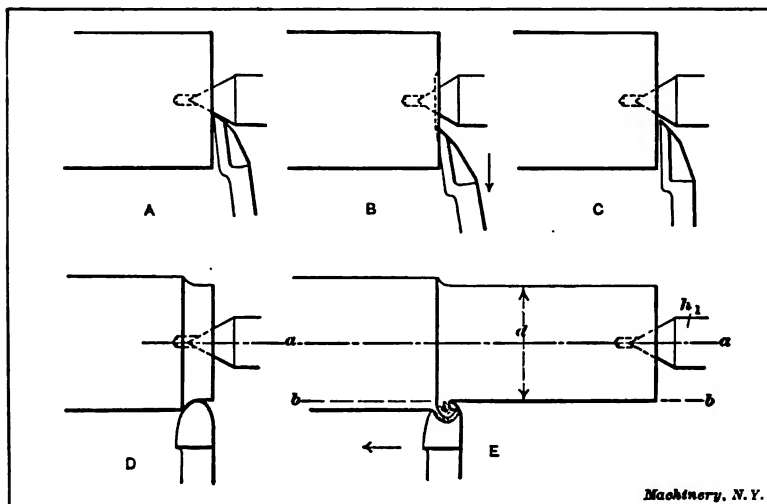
Facing End with Side Tool and Turning Work Cylindrical
